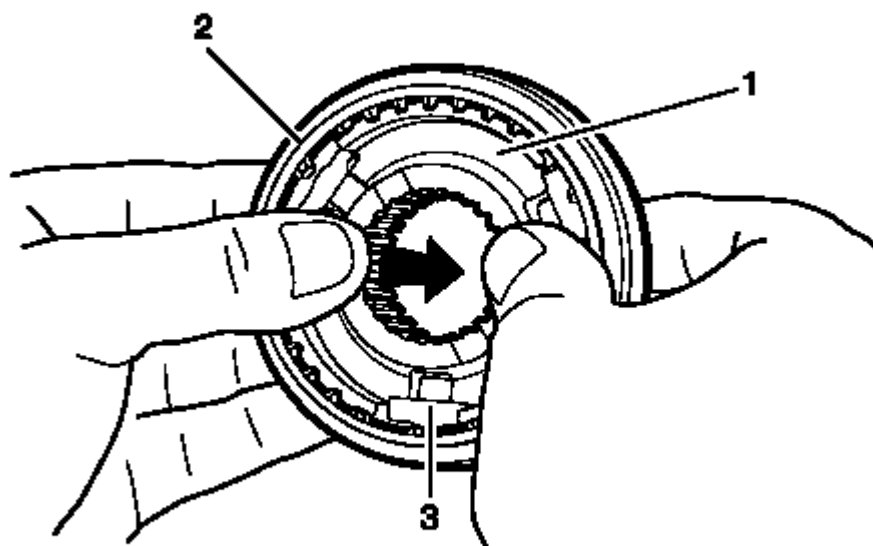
3rd-4th Synchronizer Hub Assembly
